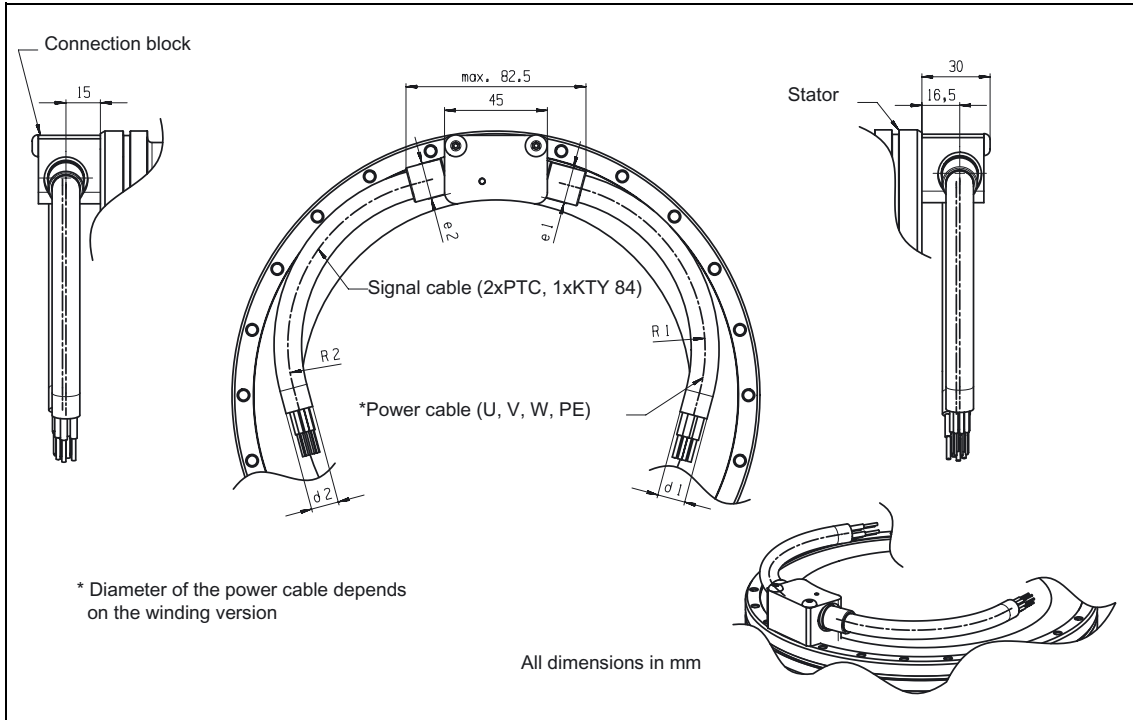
Tangential electrical connection with sleeve for 1FW6090 (motor type B)
